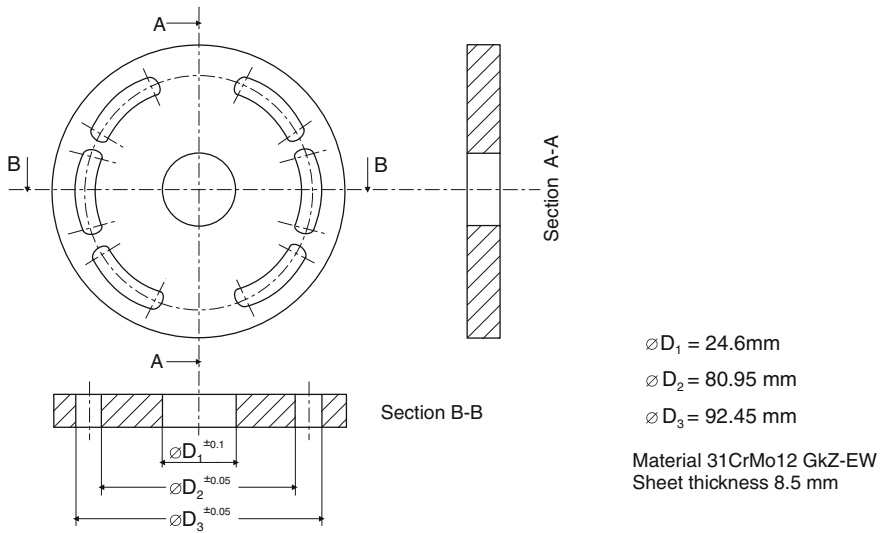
Fine-blanked control plate manufactured in a blanking and piercing tool (Source Feintool AG)
